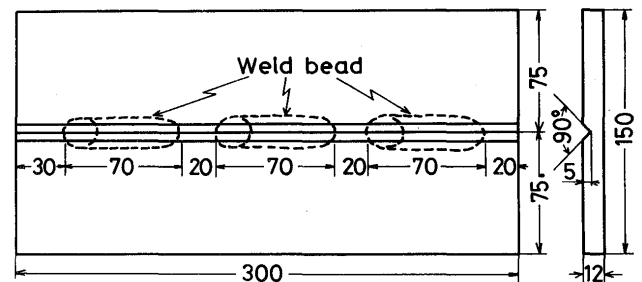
Shape and size of the Weld crater cracking test
